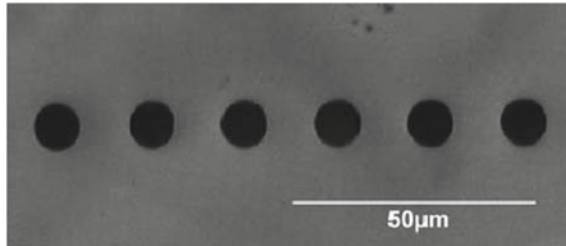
Micro-holes drilled consecutively using a single tool [13]
